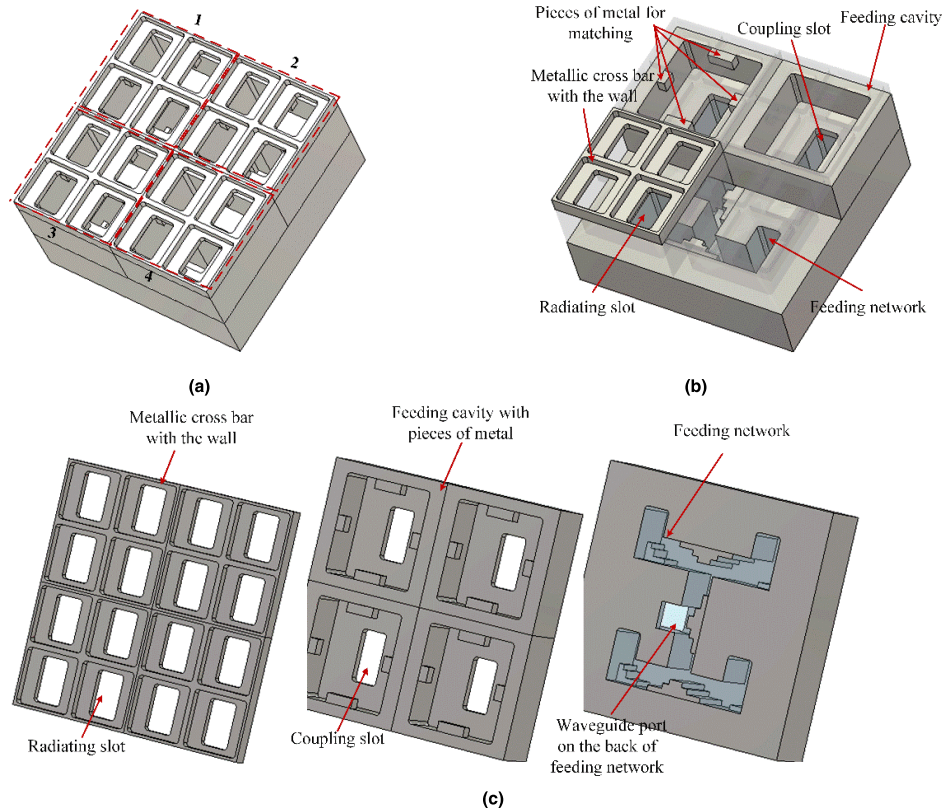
Configuration of the 2x2-element sub-array. (a) global view, (b) perspective view, (c) exploded view.
